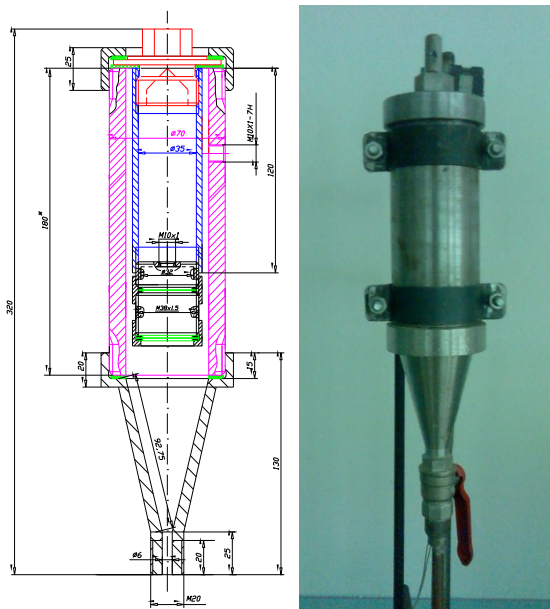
The head apparatus with hopper dispenser mixture with sieve on the bottom
